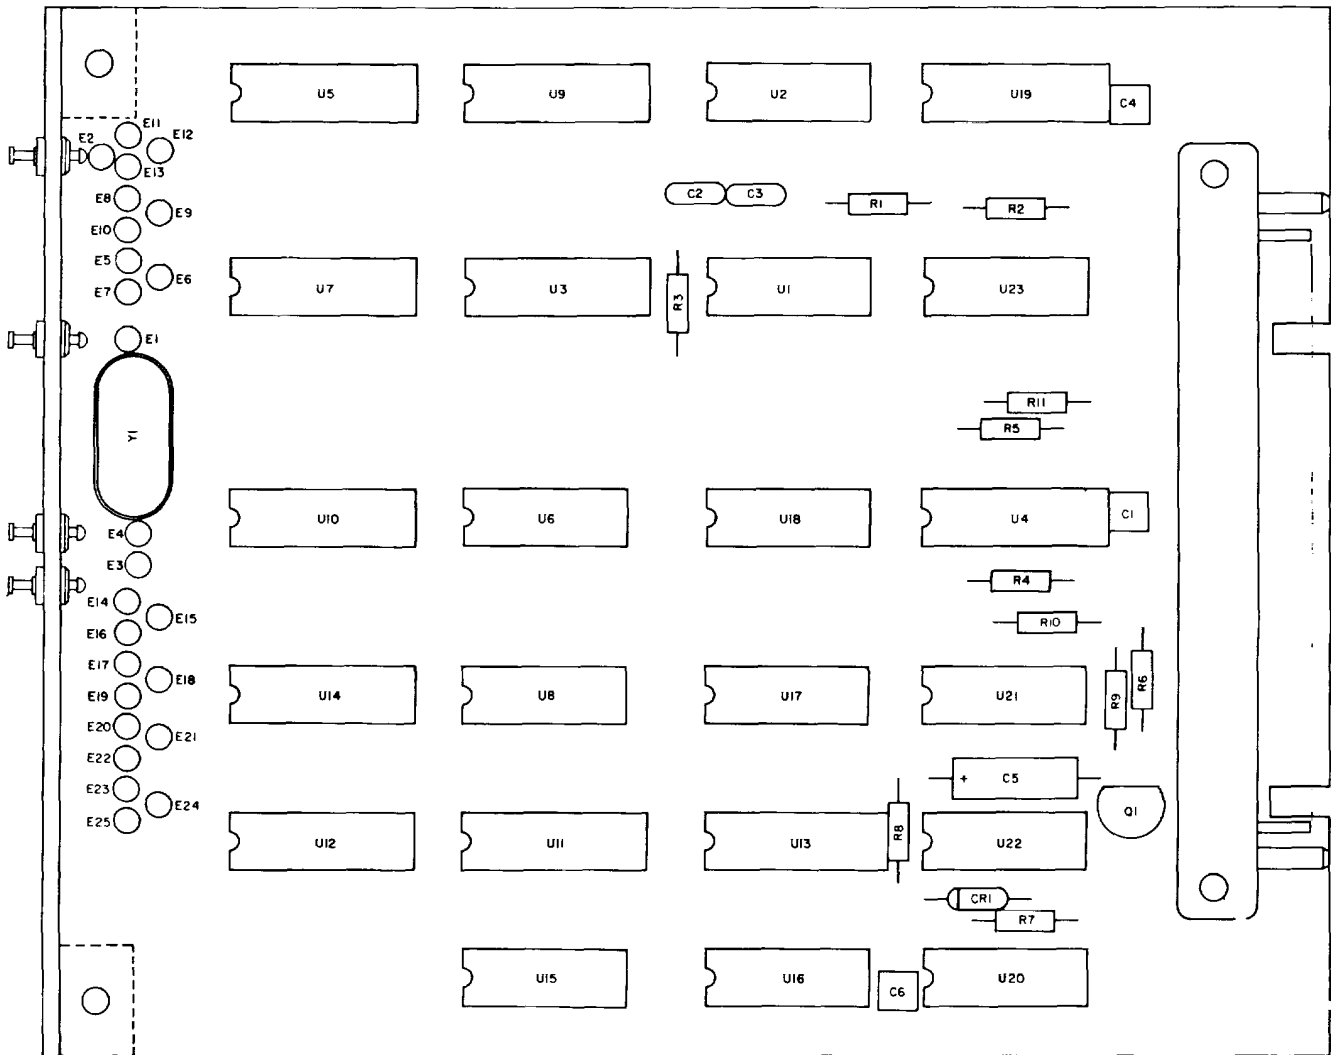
PhaseComparator Circuit Card Assembly, 1A3A2 Parts Location Diagram
